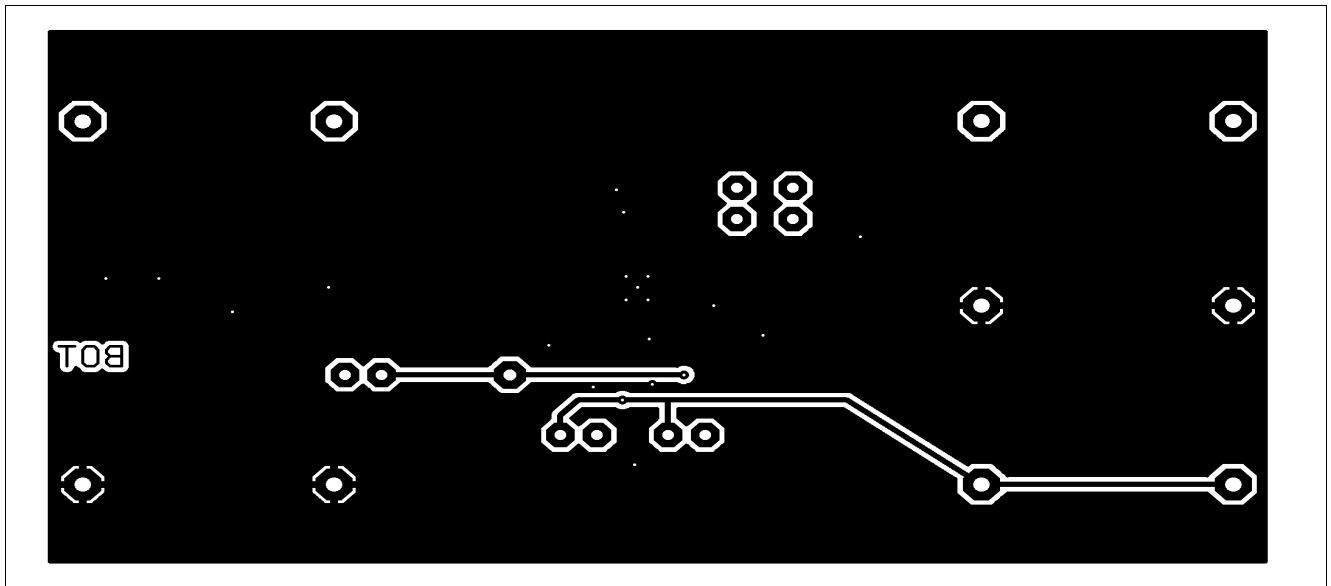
TLF4277 Demoboard V1.1 bottom layer
